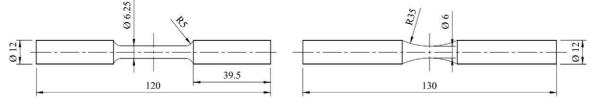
Sketch of the samples used for the tensile (on the right) and the fatigue (left) tests. Dimensions expressed in mm.
